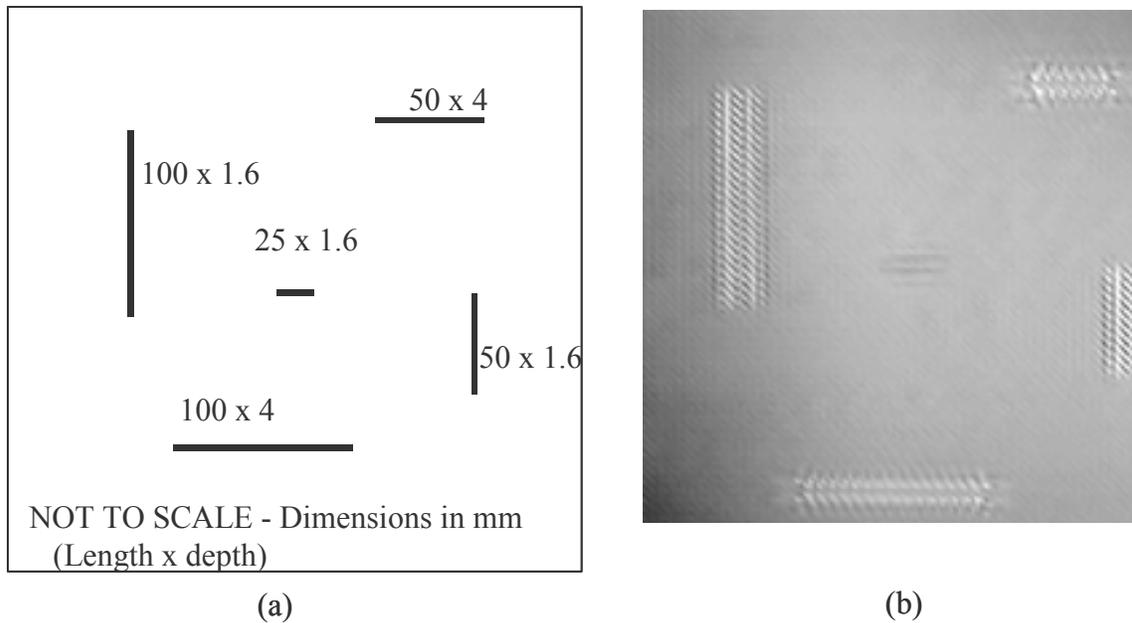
Crack-like Defect Test Plate (a) Dimensions, (b) Microwave Image, Ka-Band
